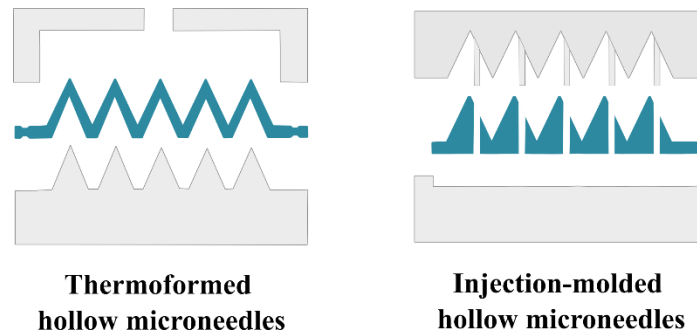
Mold insert and associated hollow MNs obtained with thermoforming versus injection molding
